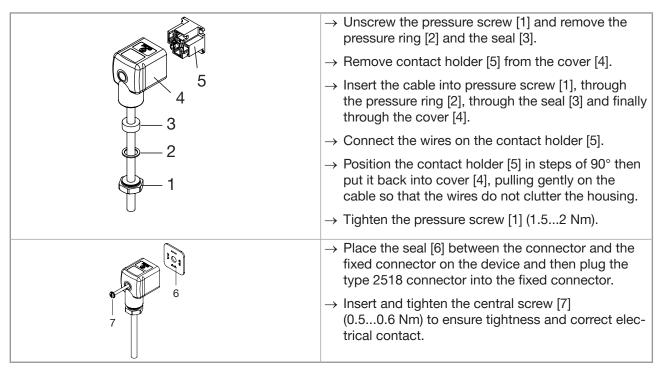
Assembling and wiring the female connector type 2518 (supplied)
